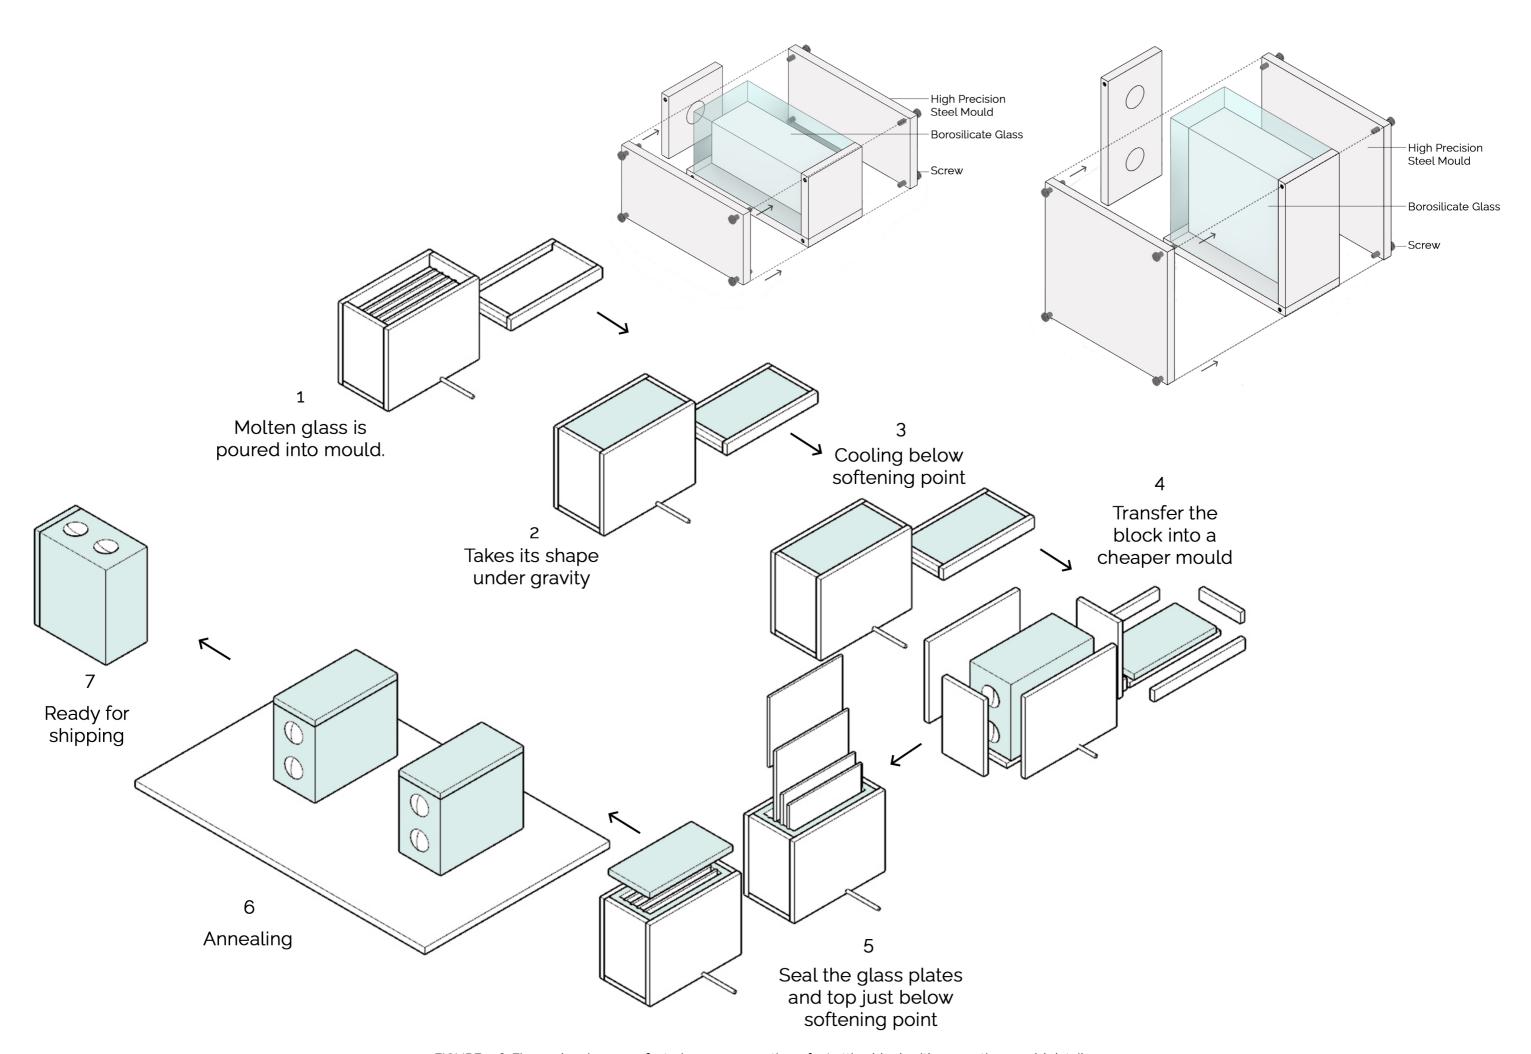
Figure showing manufacturing process option 1 for Lattice block with respective mould details
